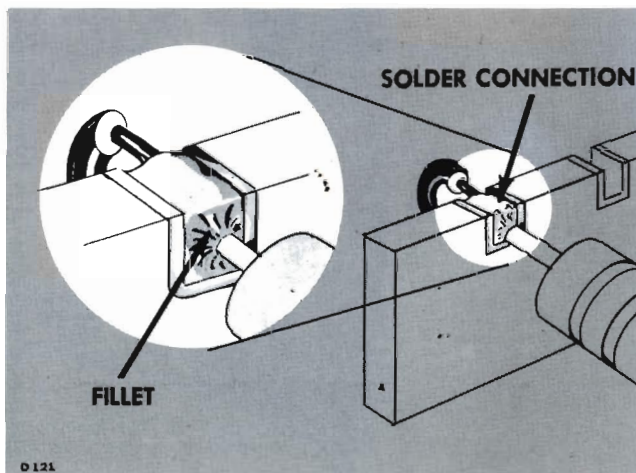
A slight fillet of solder is formed around the wire when heat is applied correctly.
